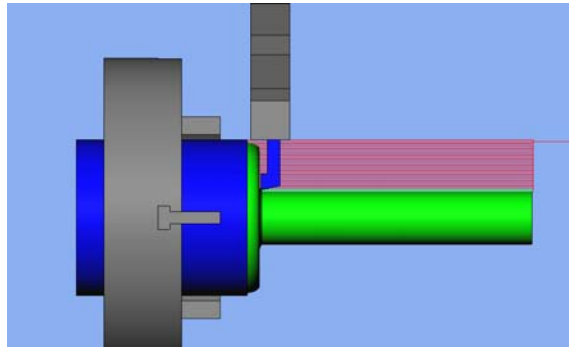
Cutting simulation on the piece mounted on the main spindle.
